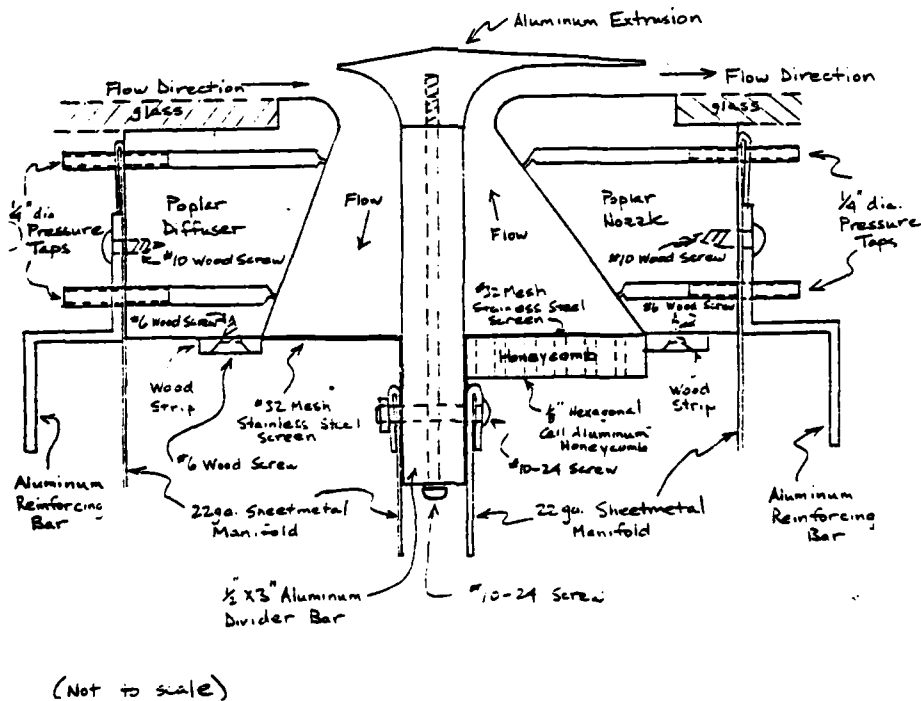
Cross sectional view of wall jet-wall suction assembly.
